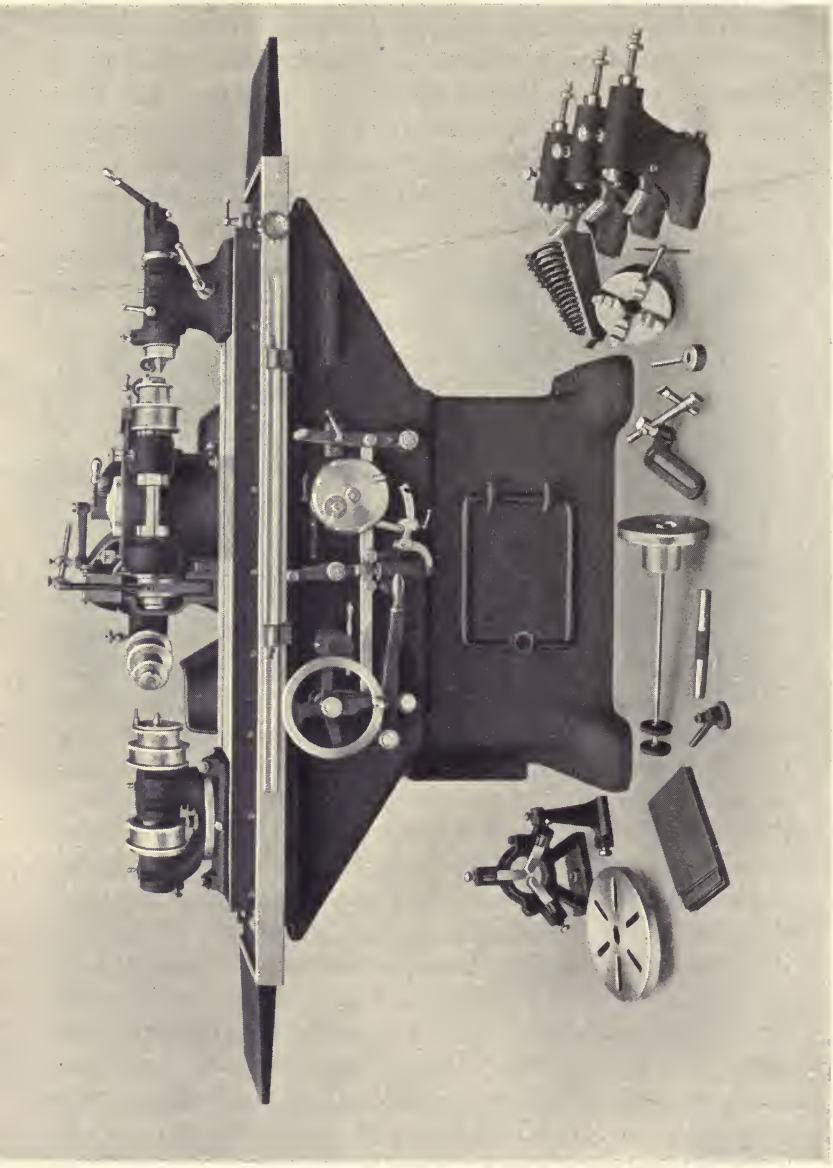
THREE SPINDLE MANUFACTURING GRINDER.—CHURCHILL.
